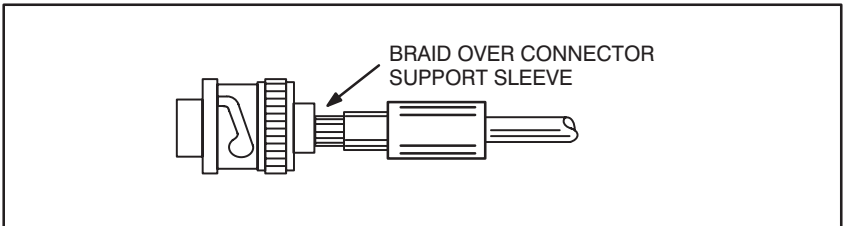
Connector Installation Step 7 for RG-59/U Cable
